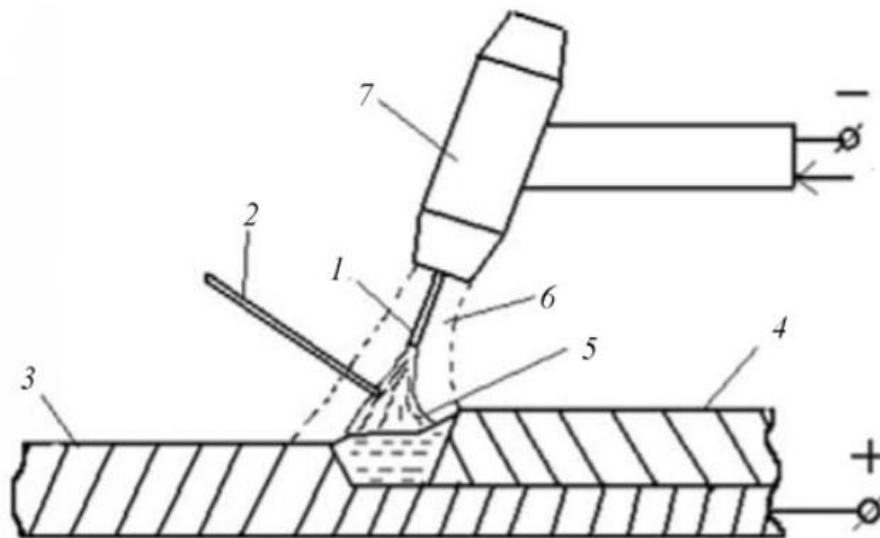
Inert gas arc welding process: 1 – electrode, 2 filler wire, 3-item, 4-weld, 5-arc, 6-stream shielding gas, 7-burner
